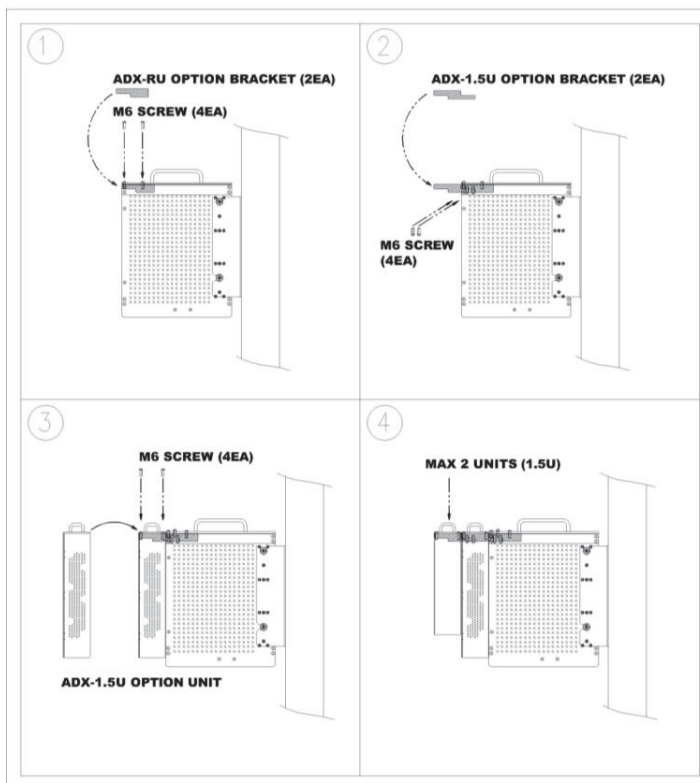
Wall Mount Instructions for ADX-RU added 1.5U Unit
